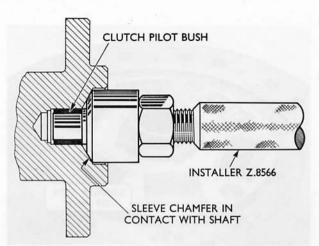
Clutch pilot bush and installer. The pilot of the installer must project through the bush with the installer nut contacting the sleeve
